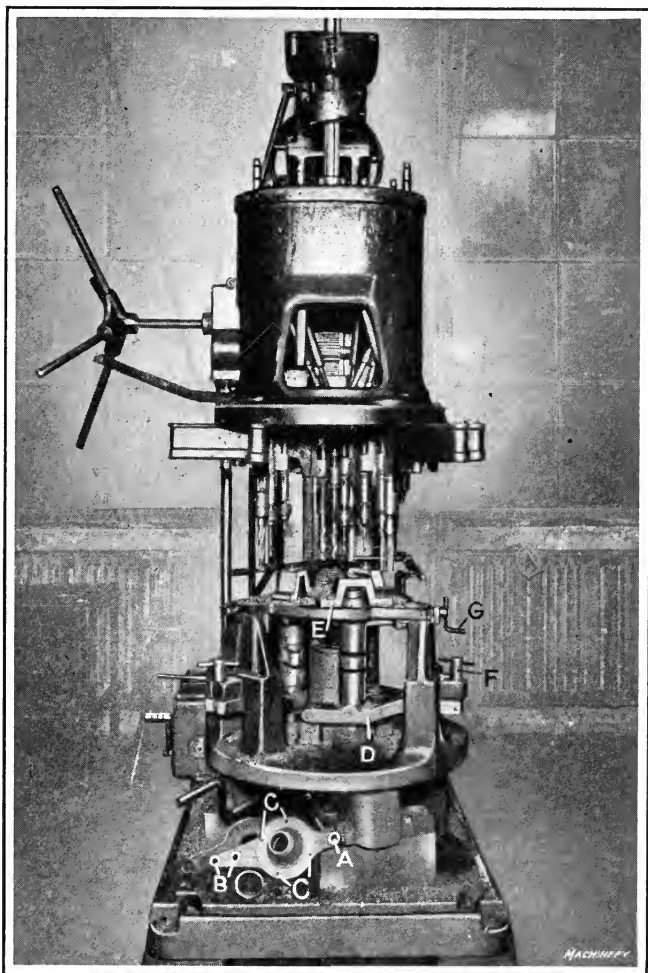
Ten-spindle Drilling Machine engaged in drilling and reaming Rear Axle Spiders
